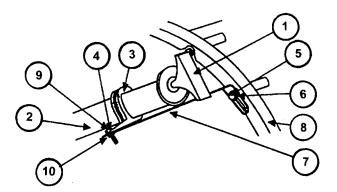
Oil Fill Tube Assembly and Oil Level Indicator (Dipstick). (Repeated).
